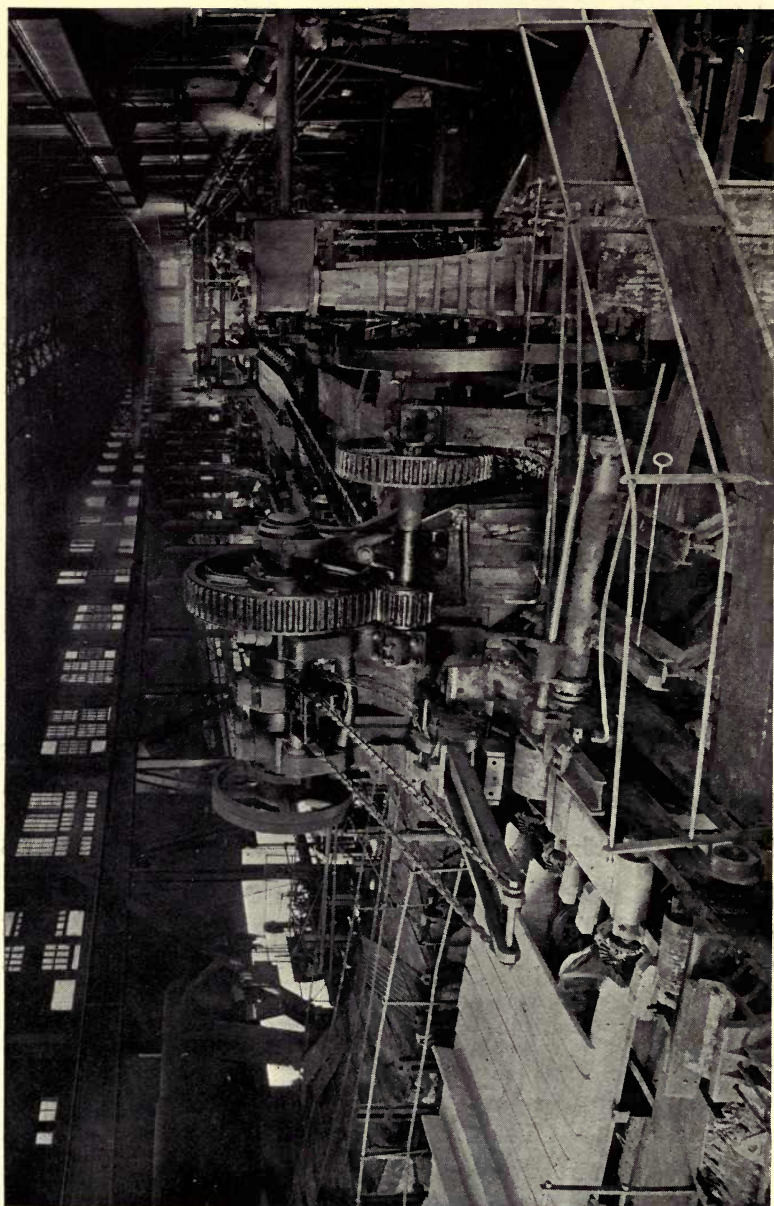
Interior of Blooming Mill Building, American Tube & Stamping Co., Bridgeport, Conn.
